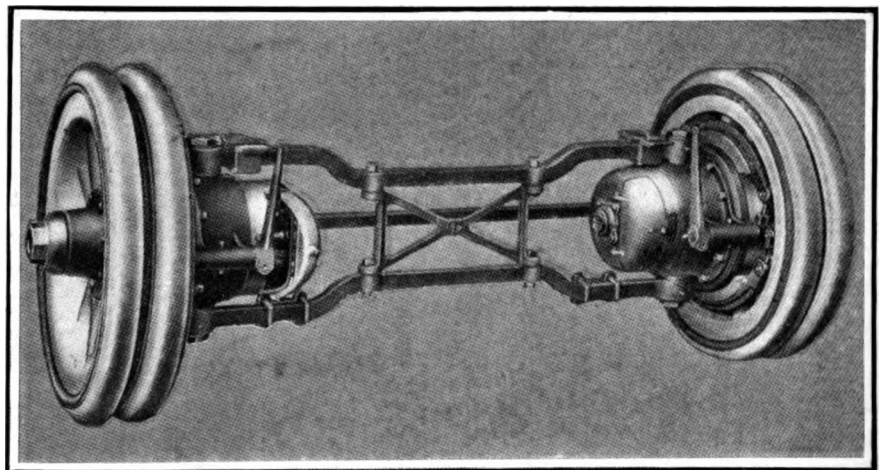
REAR AXLE ASSEMBLY OF COMMERCIAL TRUCK CO. OF AMERICA
